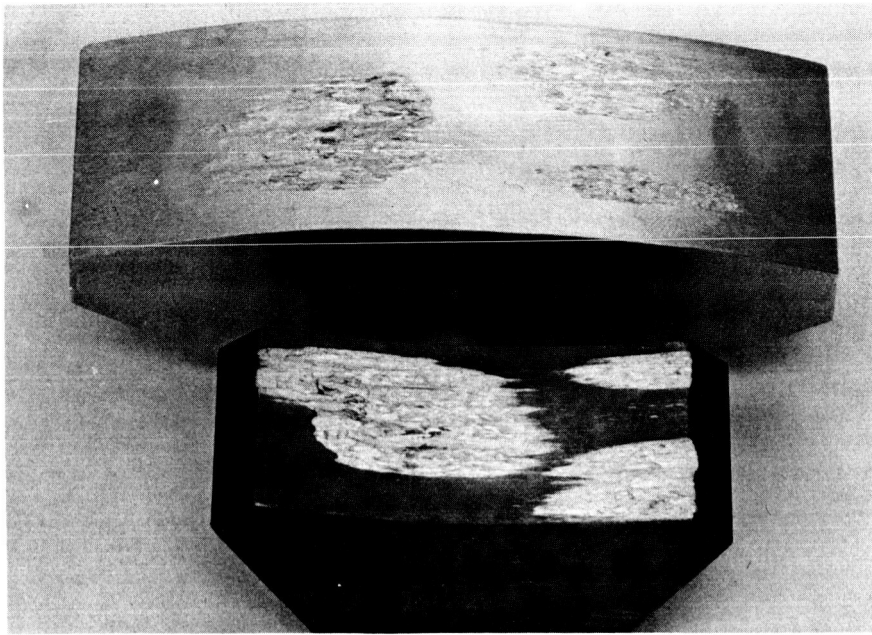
BALL JOINT TEST SPECIMEN TYPE - 1
